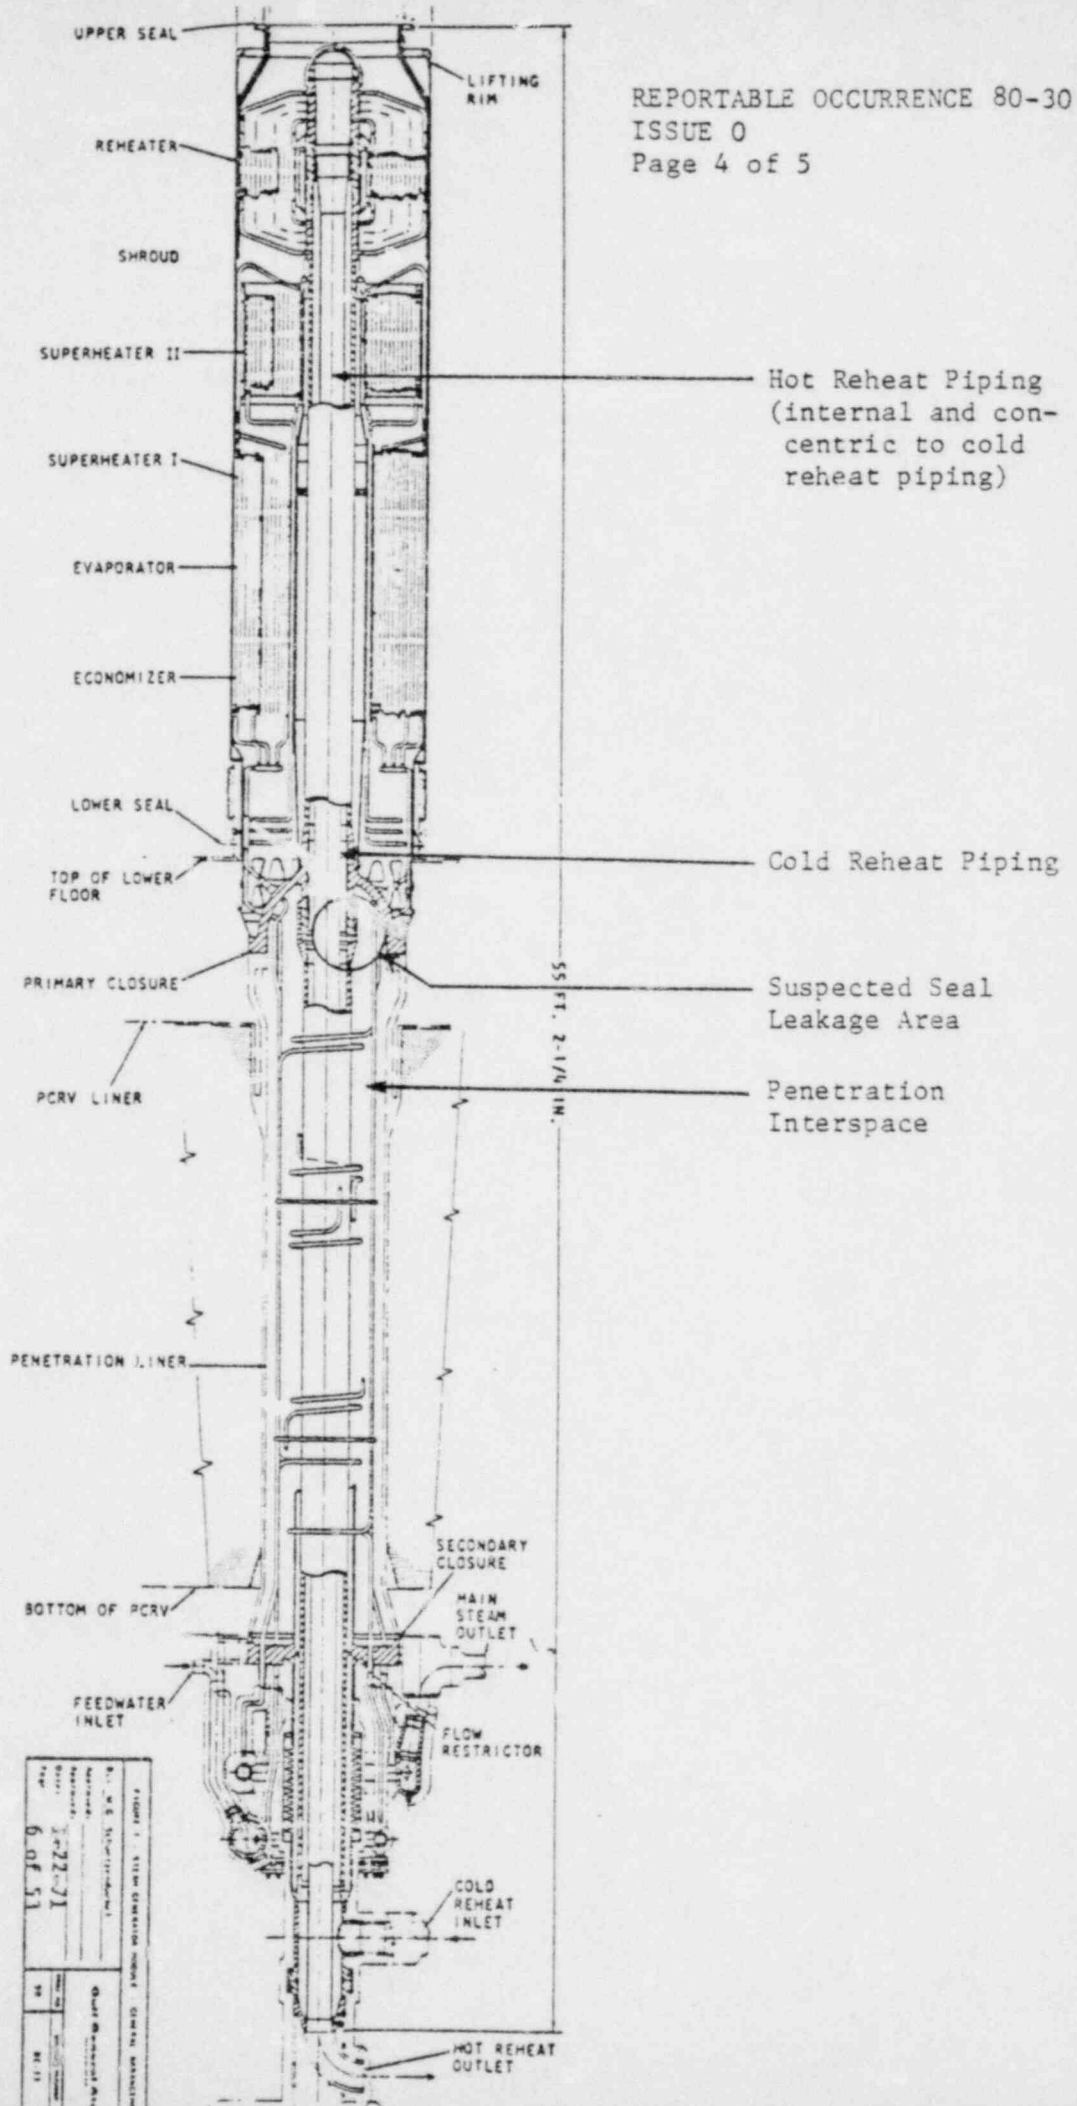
STEAM GENERATOR	GENERAL DRAWING
